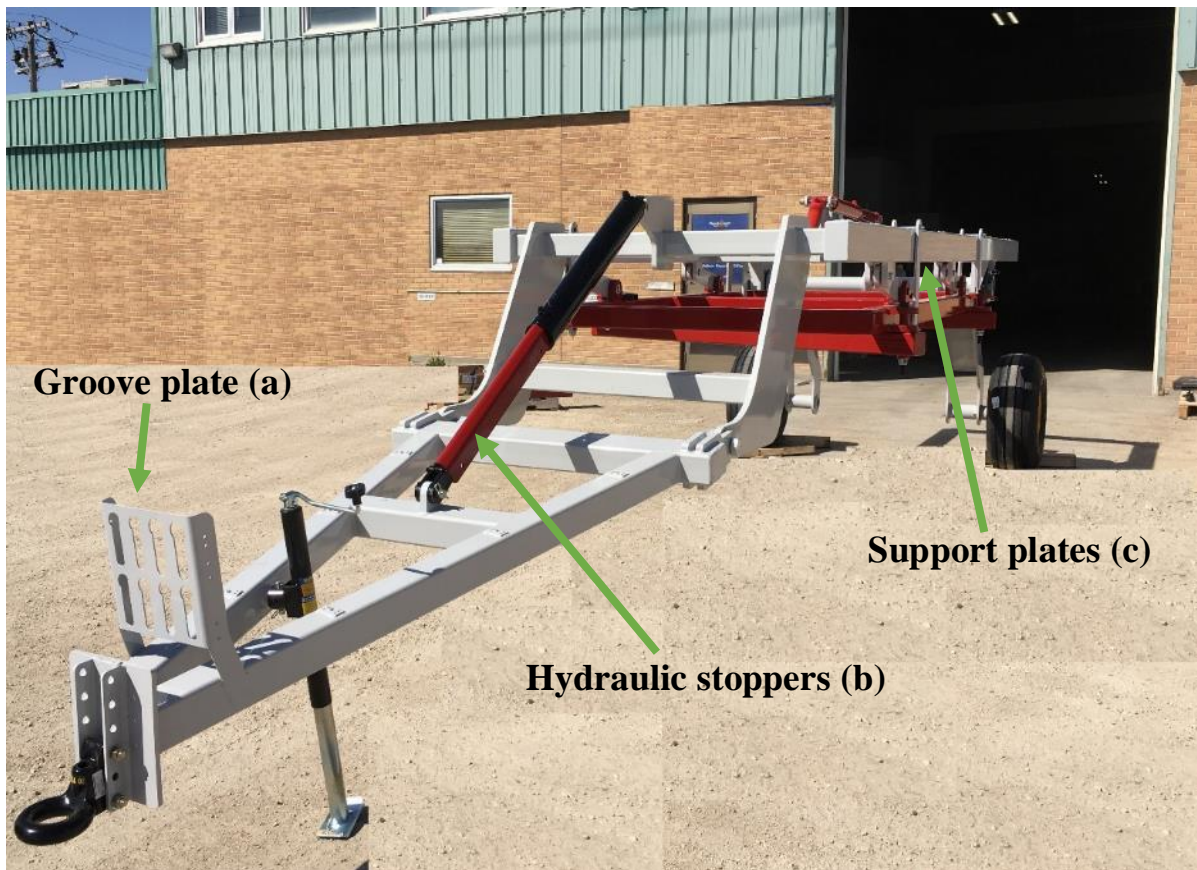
Manufactured field-testing unit with groove plate (a), hydraulic stoppers (b) and support plates (c).
